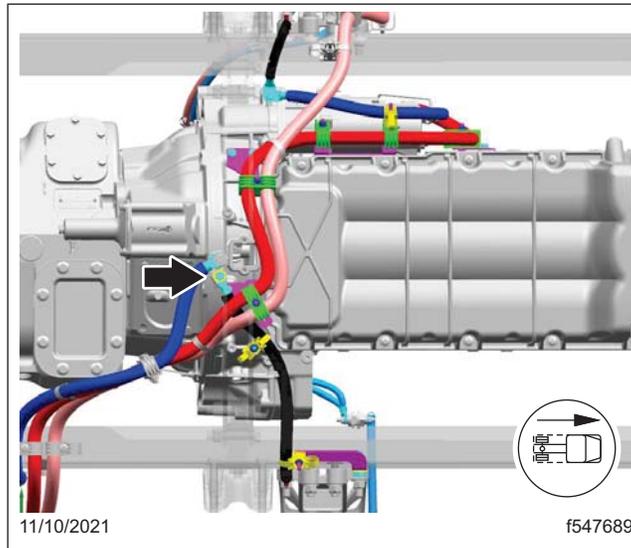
, Aluminum Battery Cable Bolt at the Flywheel Housing
